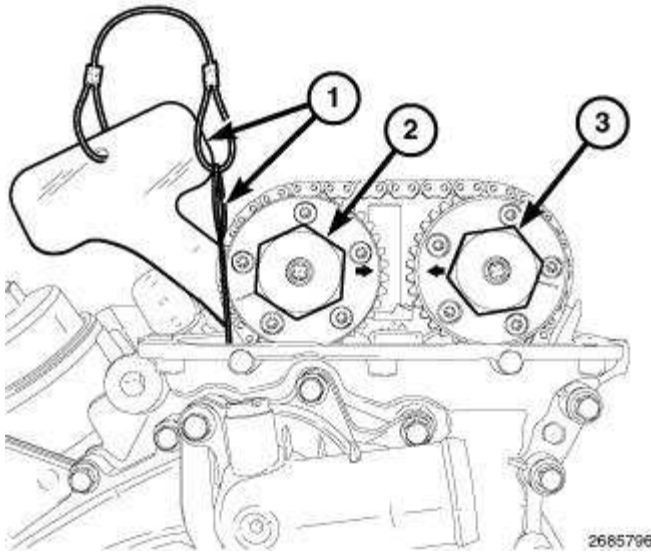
Pin, Rack, Timing Chain Holder & Oil Control Valves
